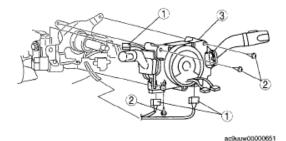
Identifying Combination Switch, Connector & Screw Courtesy of MAZDA MOTORS CORP.
